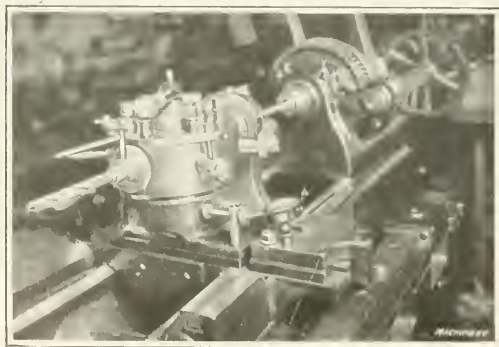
Lathe equipped with Indicator for gaging Crosswise Dimensions
